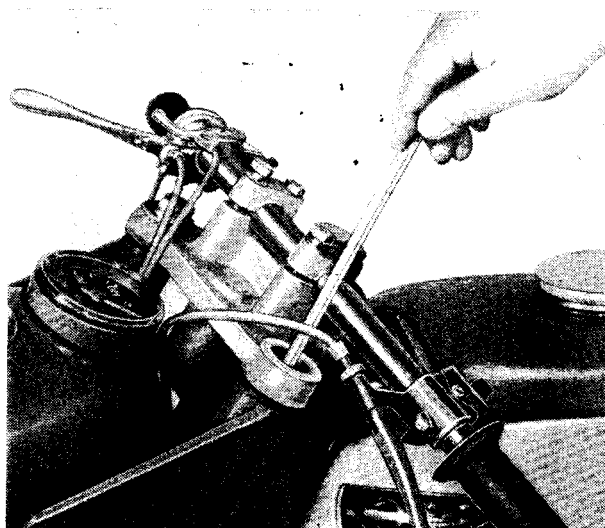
Oil level checking by dipstick: Insert the dipstick through the interior of the compression spring down to the stop; required oil level is 210 mm above lower edge of dipstick
